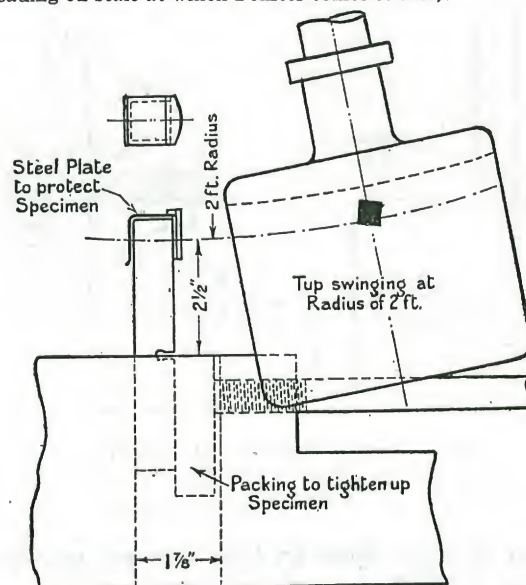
ENLARGED VIEW SHOWING TEST PIECE IN POSITION IN TESTING MACHINE
